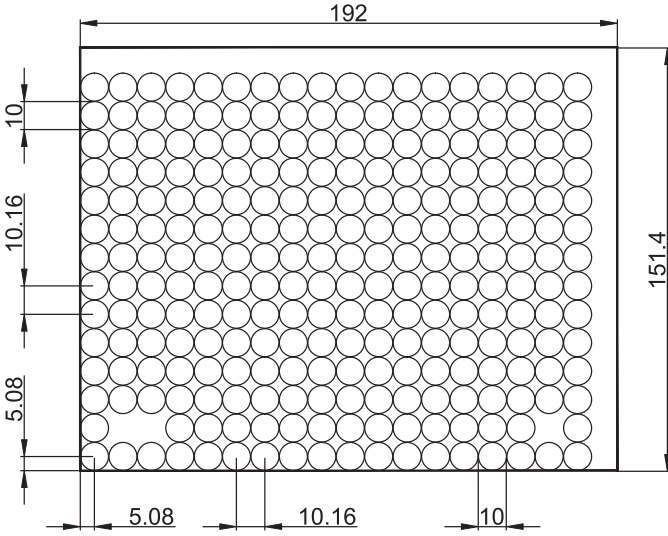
Dimensional drawing of the transducer array. Dimensions are in mm.
